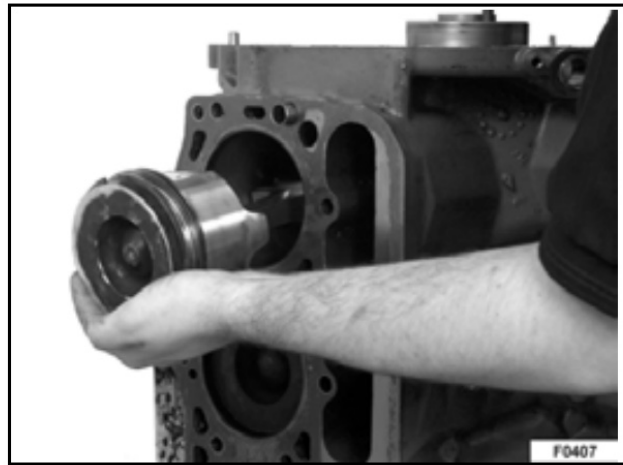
Removing Piston and Connecting Rod Assembly from Crankcase
